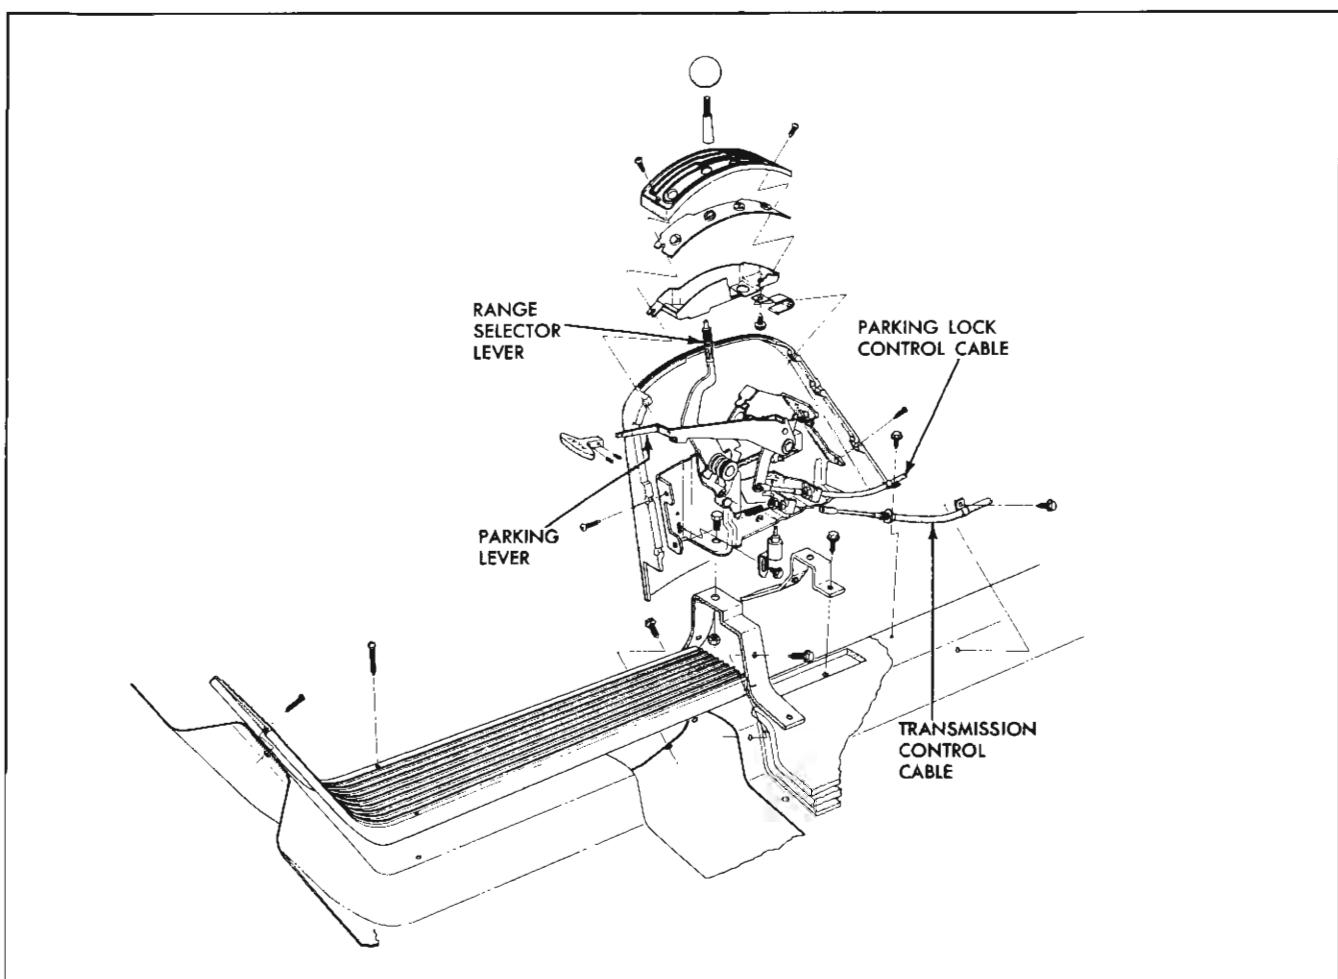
A-19 Transmission and Parking Lock Control Cables—Console Mounted
